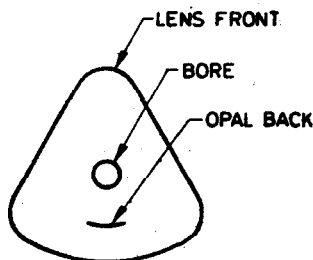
CROSS-SECTION OF CAPILLARY TUBES OF MEDICAL THERMOMETERS
